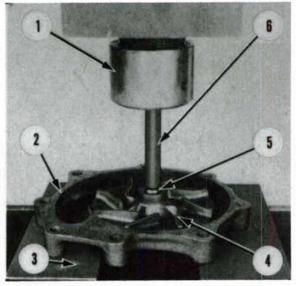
Press bearing and shaft assembly out front of pump housing.
